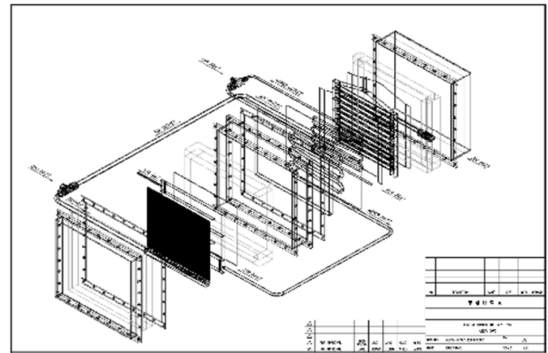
The 3D sketch of steam reforming reactor - isometric view
